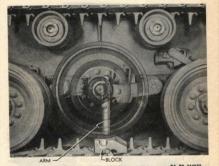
Track Wheel Raised by Wheel Lifter 41-L-1379
